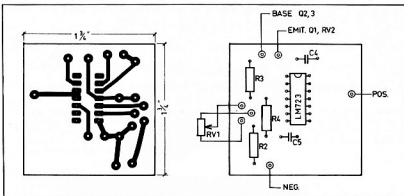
CIRCUIT BOARD AND COMPONENT LAYOUT
